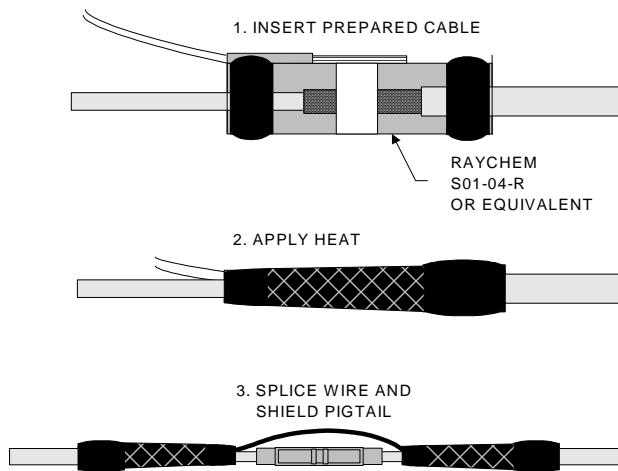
Shielded connection (Outer Heat-Shrink Tubing Not Shown)
